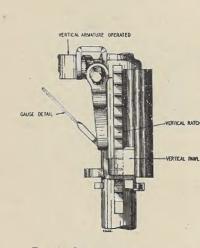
CHECKING THE TENSION OF THE VERTICAL-PAWL SPRING ARMATURE-RESTORING SPRING
